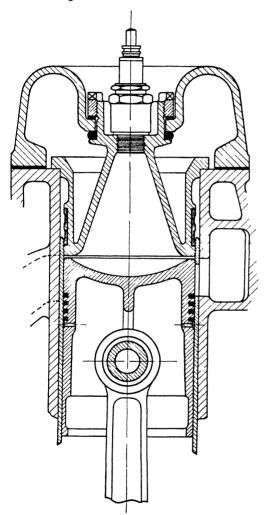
5.—Sleeve-valve combustion chamber as developed for very smooth running
